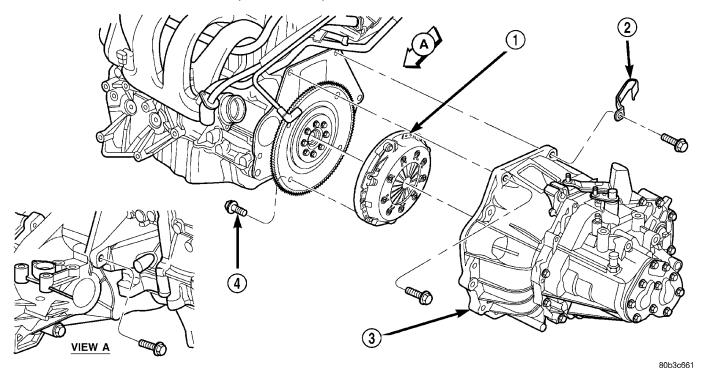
Transaxle Removal/Installation (2.0/2.4L Shown)
